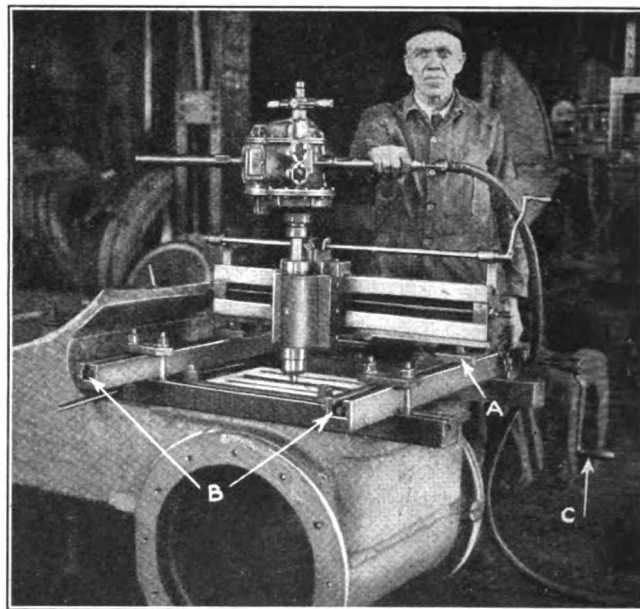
MILLING PORTS IN SLIDE-VALVE CYLINDERS
